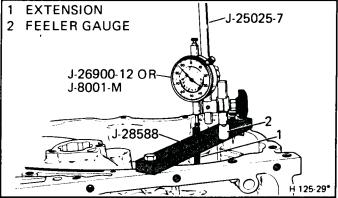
Selective Snap Ring End Play (Sun Gear/Input Drum)
